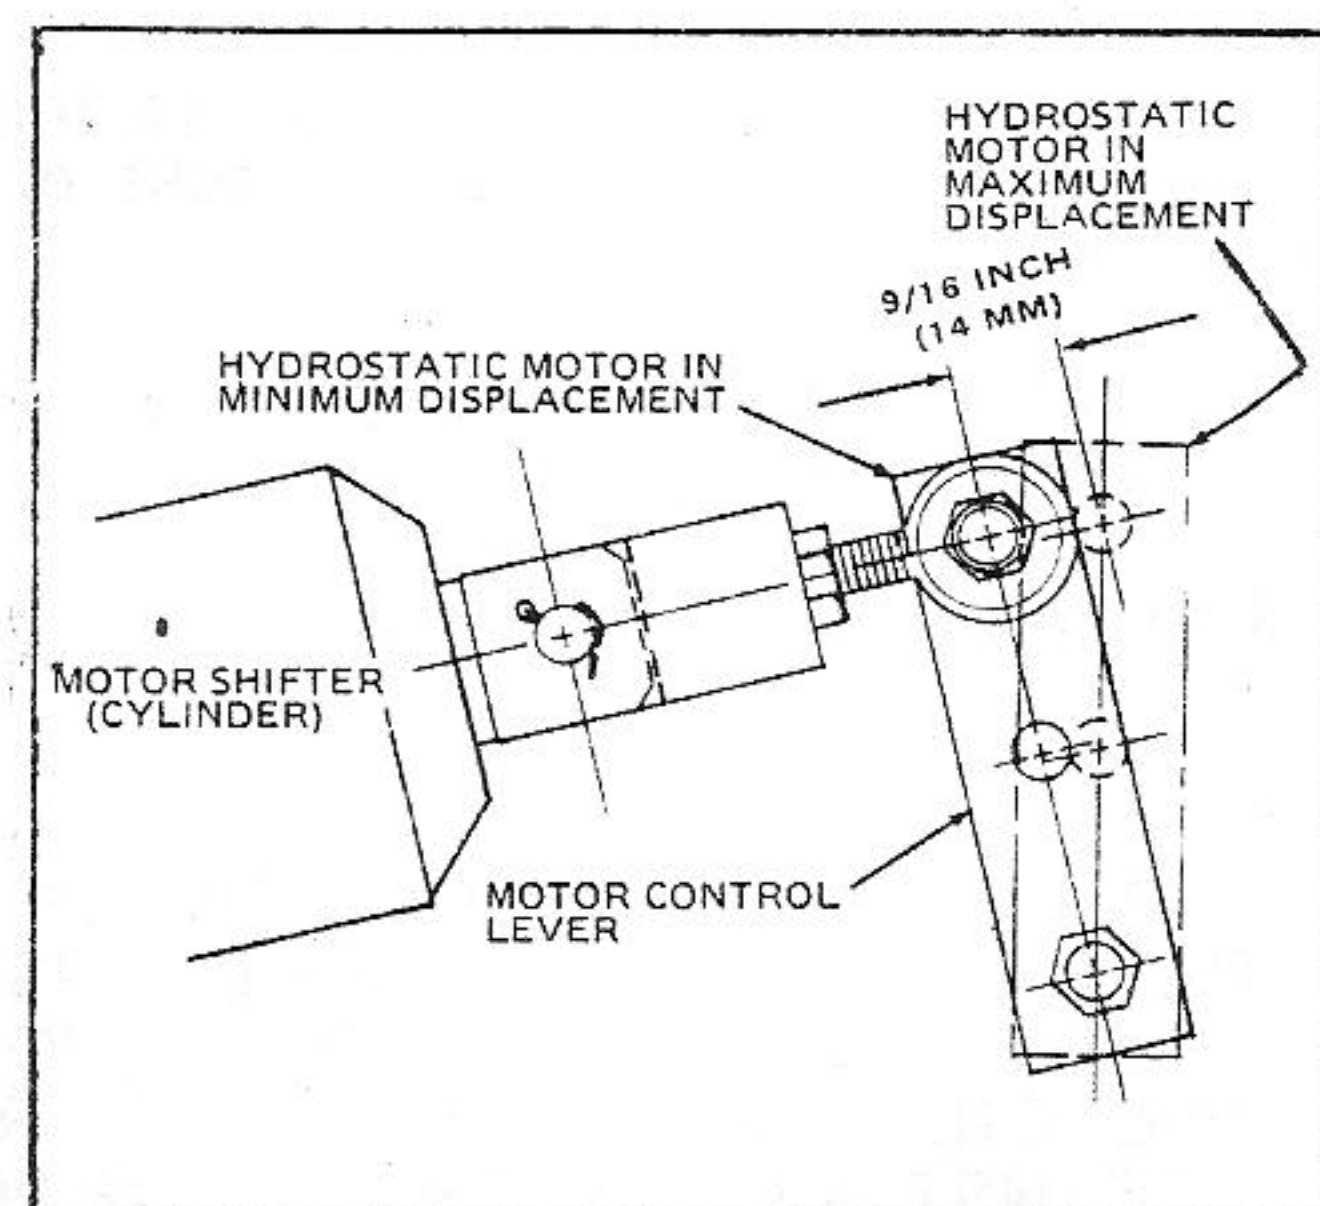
6. MOTOR SHIFTER ADJUSTMENT
